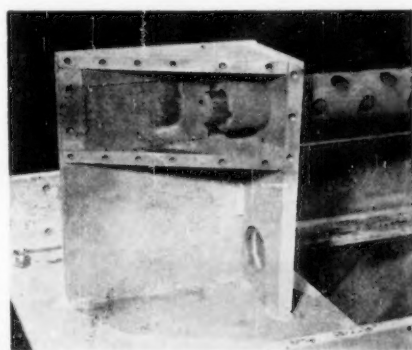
View of Gun-Blast Erosion Test Jig.
